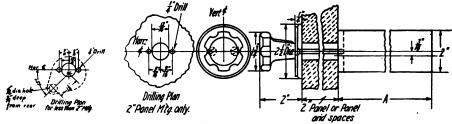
Outline Dimensions and Drilling Plan for All Except Multi-Circuit Voltmeter Switches
